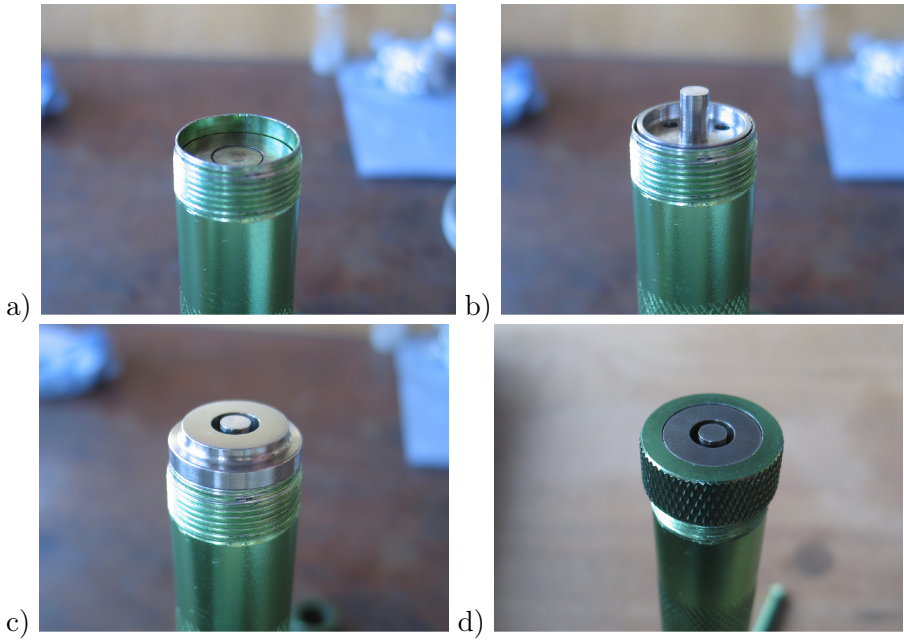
Handheld extruder die assembly: a) ram, b) mandrel, c) mandrel and die, and d) mandrel, die and cap.
